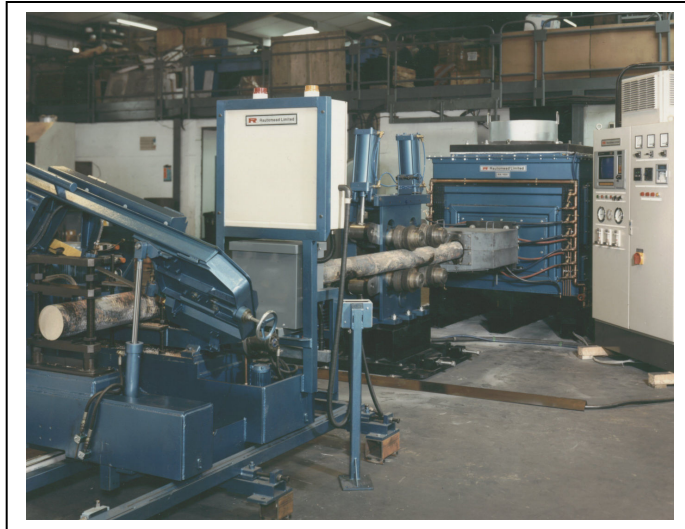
Horizontal Continuous Casting – Copper Alloy Extrusion Billet
